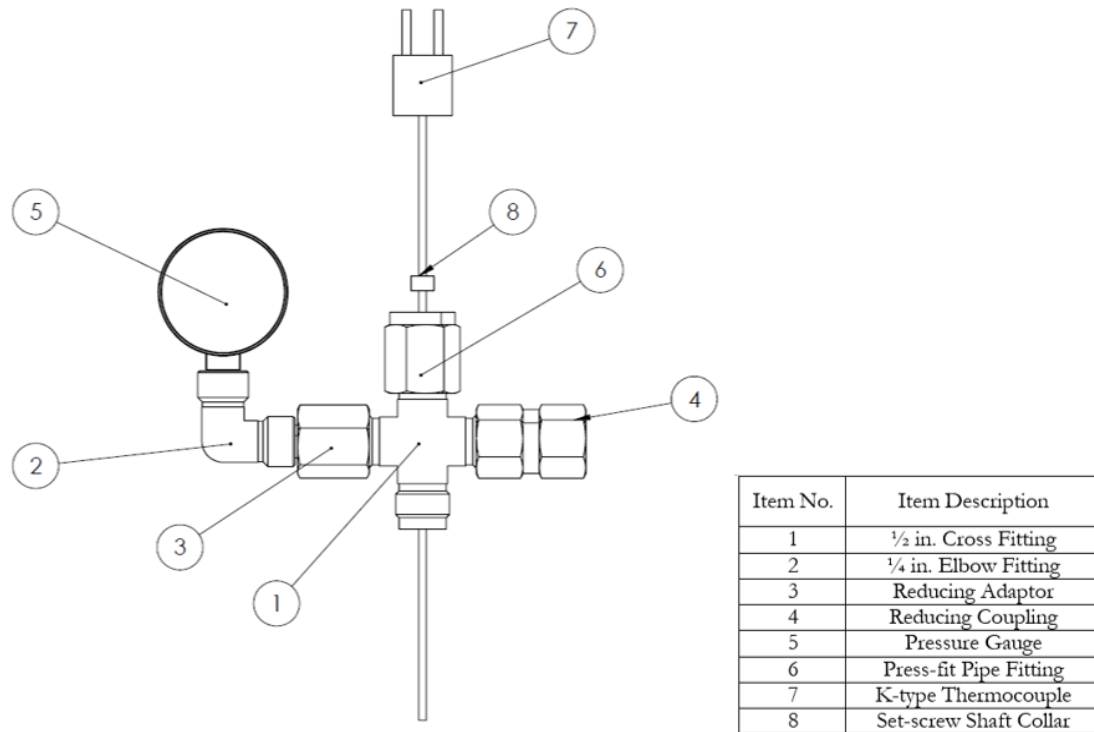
Preliminary Engineering Drawing of the MCMA Assembly.
